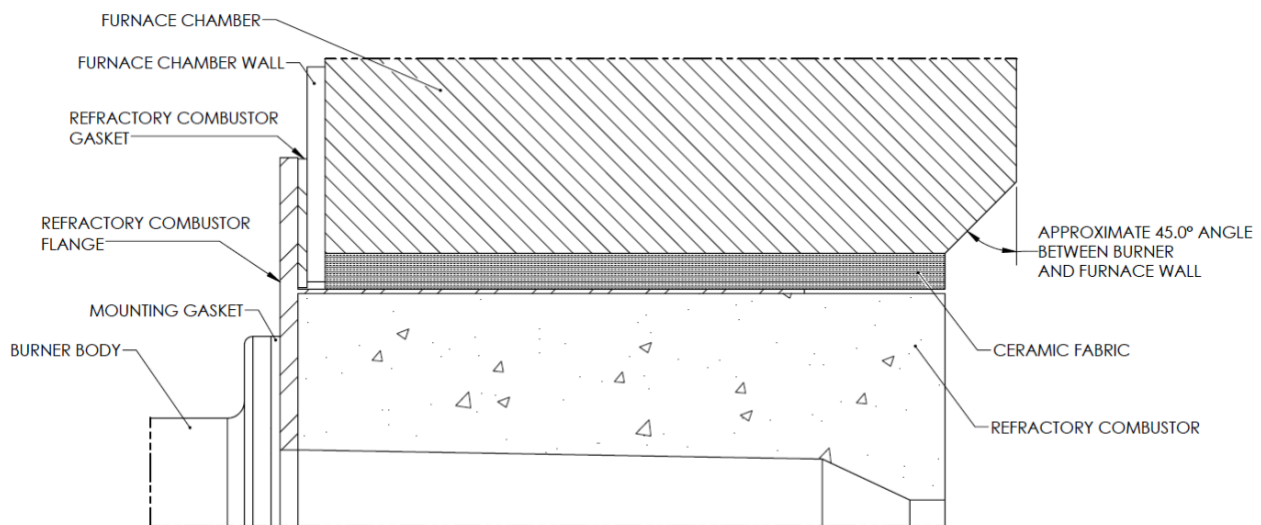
Silicon Carbide Combustor Mounted to Furnace Chamber
